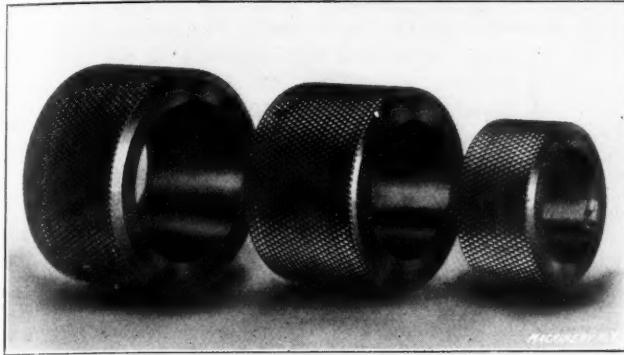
Knurled Nut Blanks made at a Rapid Rate on the Cleveland Automatic Screw Machine
